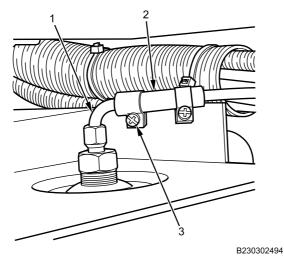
Fuel-Fired Heater Fuel Pump Fuel Line.
